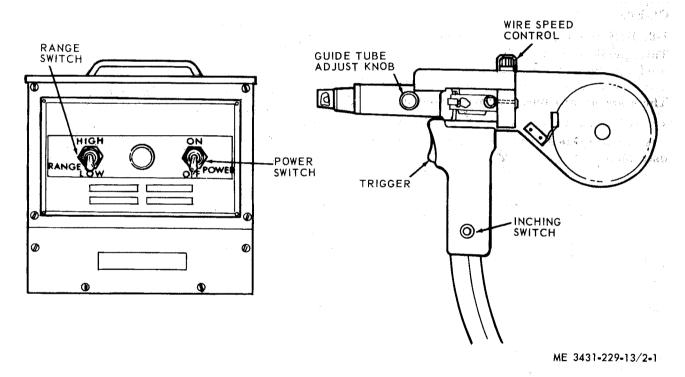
Welding gun and control monitor controls and instruments.
